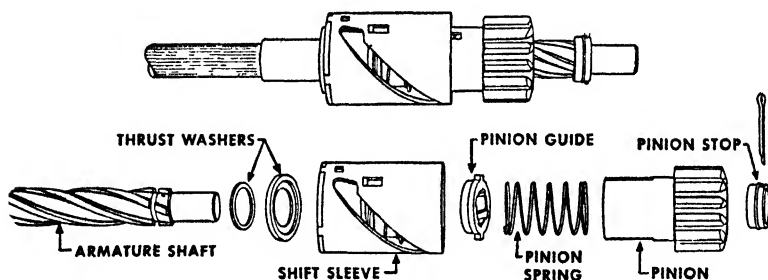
PARTS OF DYER STARTER DRIVE.
